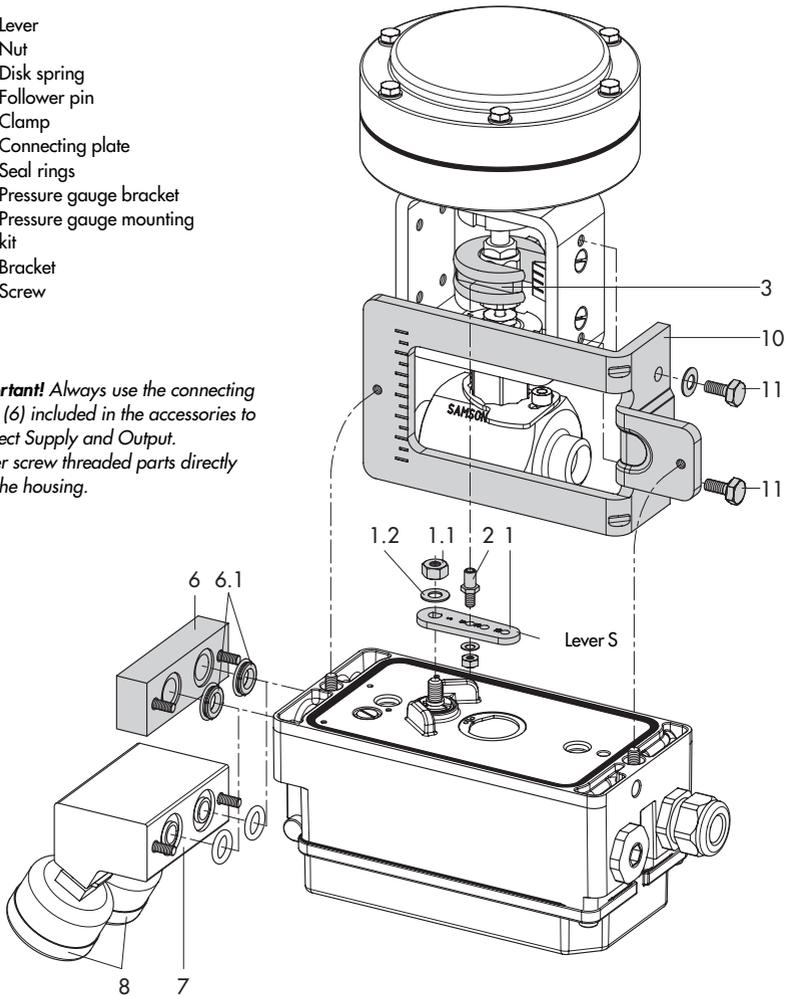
· Attachment to Type 3510 Micro-flow Valve
